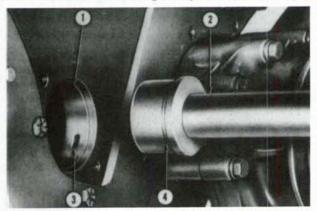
View showing special tool for camshaft bearing installation. Be sure that bearings are installed with oil holes aligned with oil passages in cylinder block.
